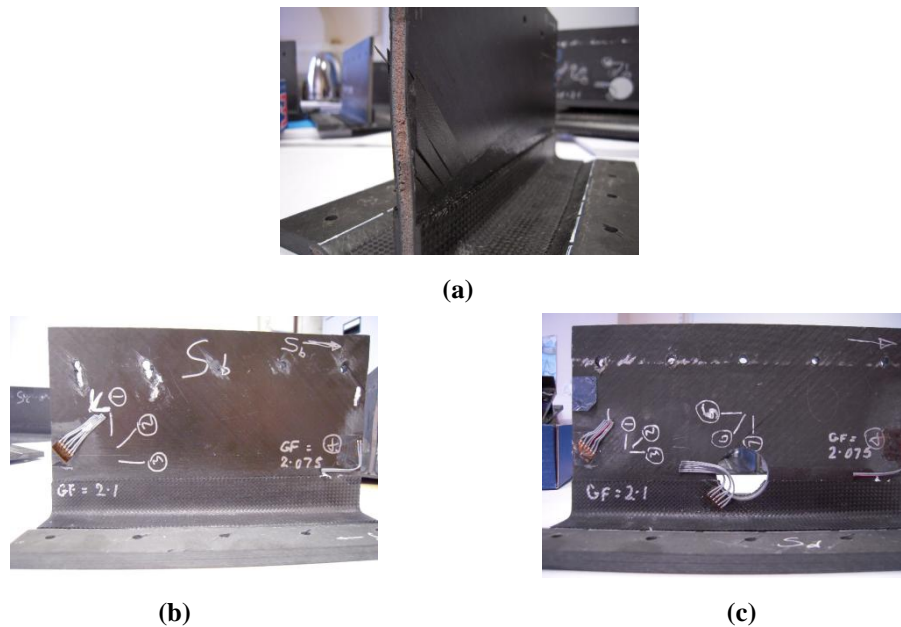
Test sample failure: (a) Sample Sa; (b) Sample Sb and (c) Sample Sc
